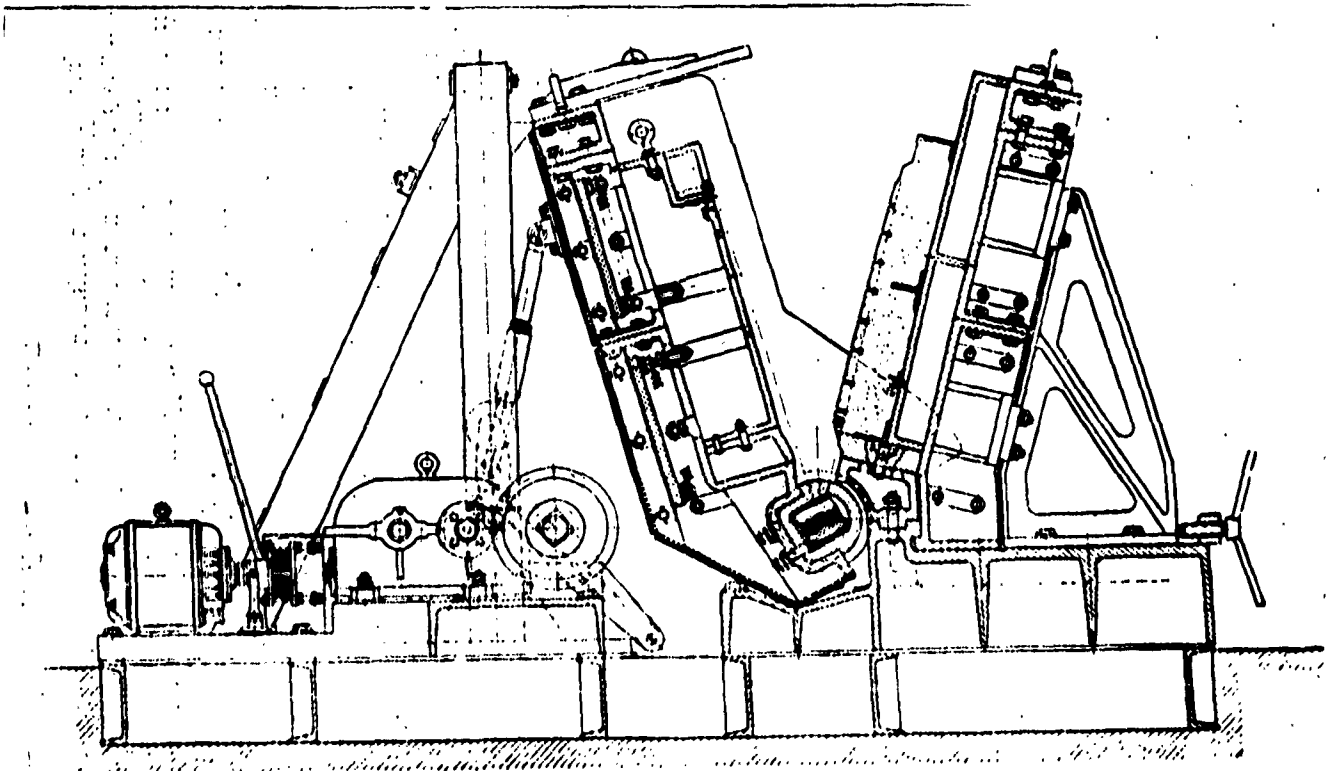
Cross section of a machine for extrusion casting with electro-mechanical drive.
